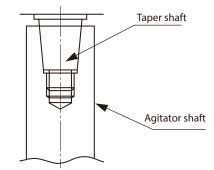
Example of Agitator Shaft Assembly (C14VM, C17VM, C24VM, C27VM) Figure 16-2 Example of Agitator Shaft Assembly (C15VM, C18VM, C25VM, C28VM)
